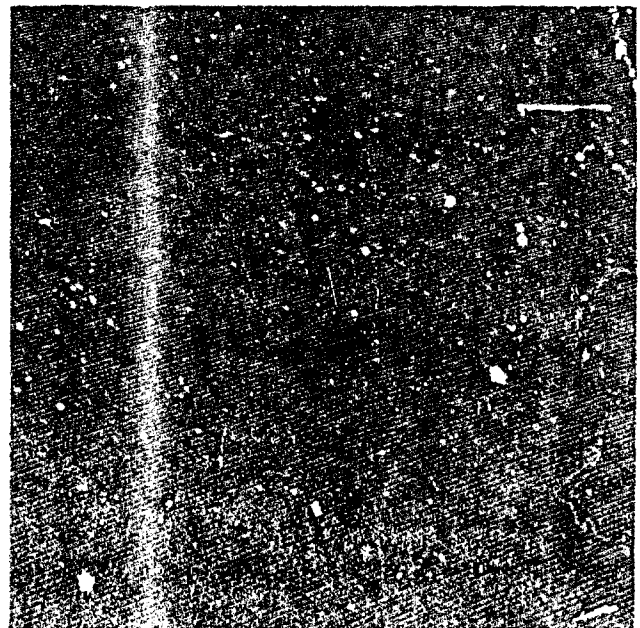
Fractograph Showing a Mixed Quasi-Cleavage and Dimpled Rupture Fracture Mechanism with the Presence of a Smooth Corrosion Product (see arrows).
